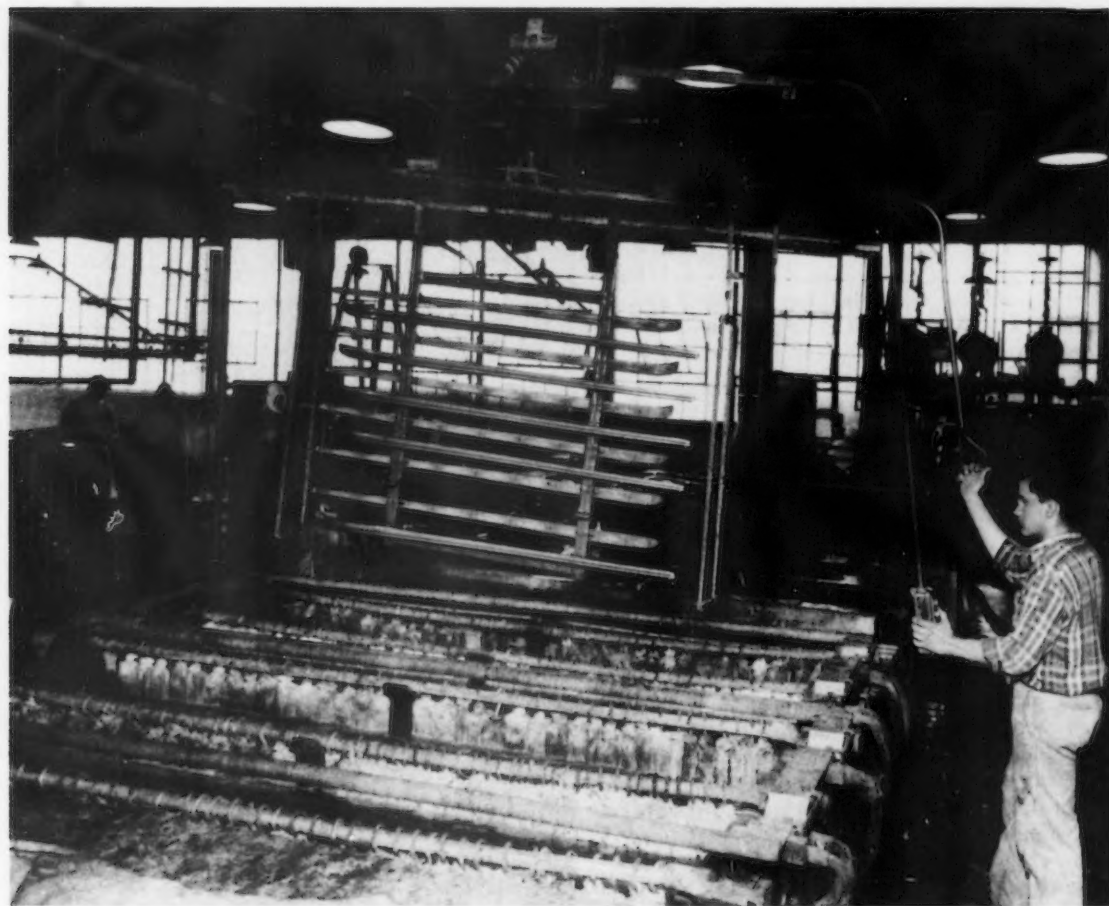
Start of the double row of deep tanks for large die-castings. Operator at right is racking Oldsmobile grille bars.
